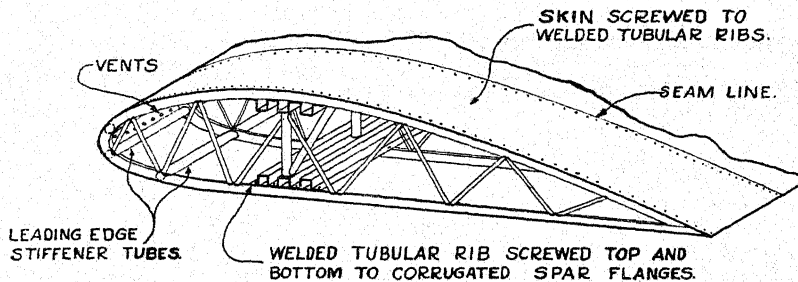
Arc welded stainless steel wing—all frame joints gusseted.
